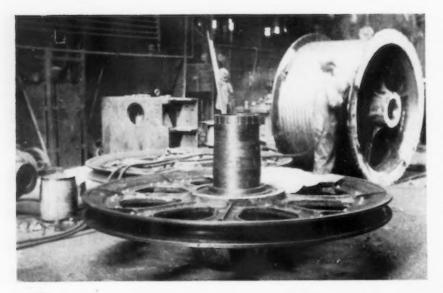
Two-piece sheave, 90 in. in diameter, ground on 10-ft, boring mill.
